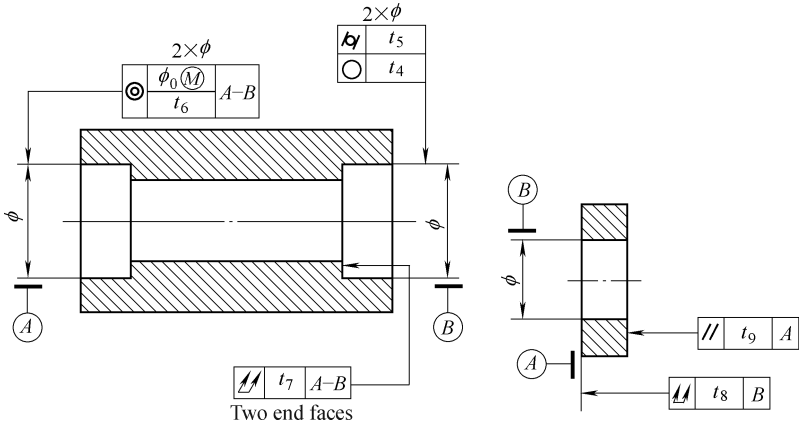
Marking method for the geometric tolerance of the housing bore matching to grade 2 bearing
